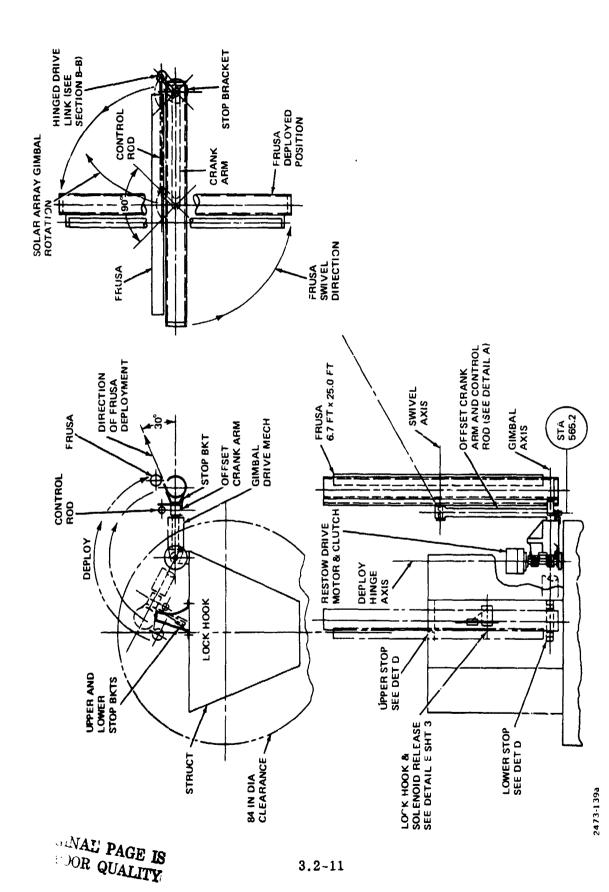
LANDSAT H-1A SOLAR ARRAY ASSEMBLY AND DETAILS (SHEET 1 OF 3)
